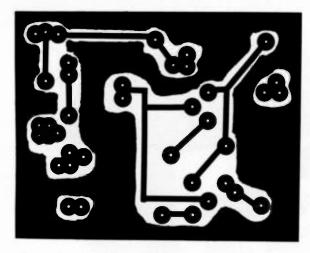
PC board layout, foil side. (Single-sided, fiberglass, copper-clad board.)
